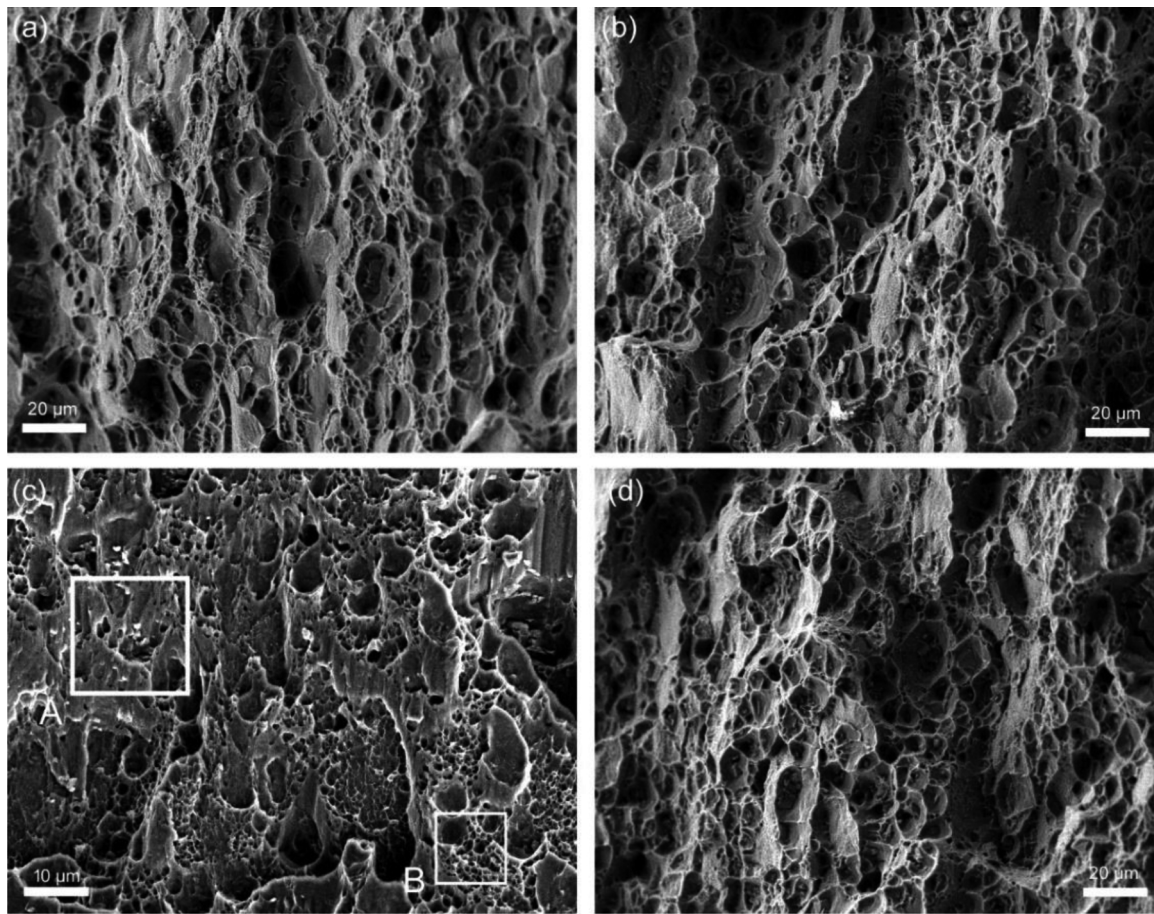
SEM analysis of the fracture surfaces of the weld with the CS interlayer: samples 1-CS (a) and 2-CS (b); and with the niobium interlayer: samples 1-Nb (c) and 2-Nb (d).
